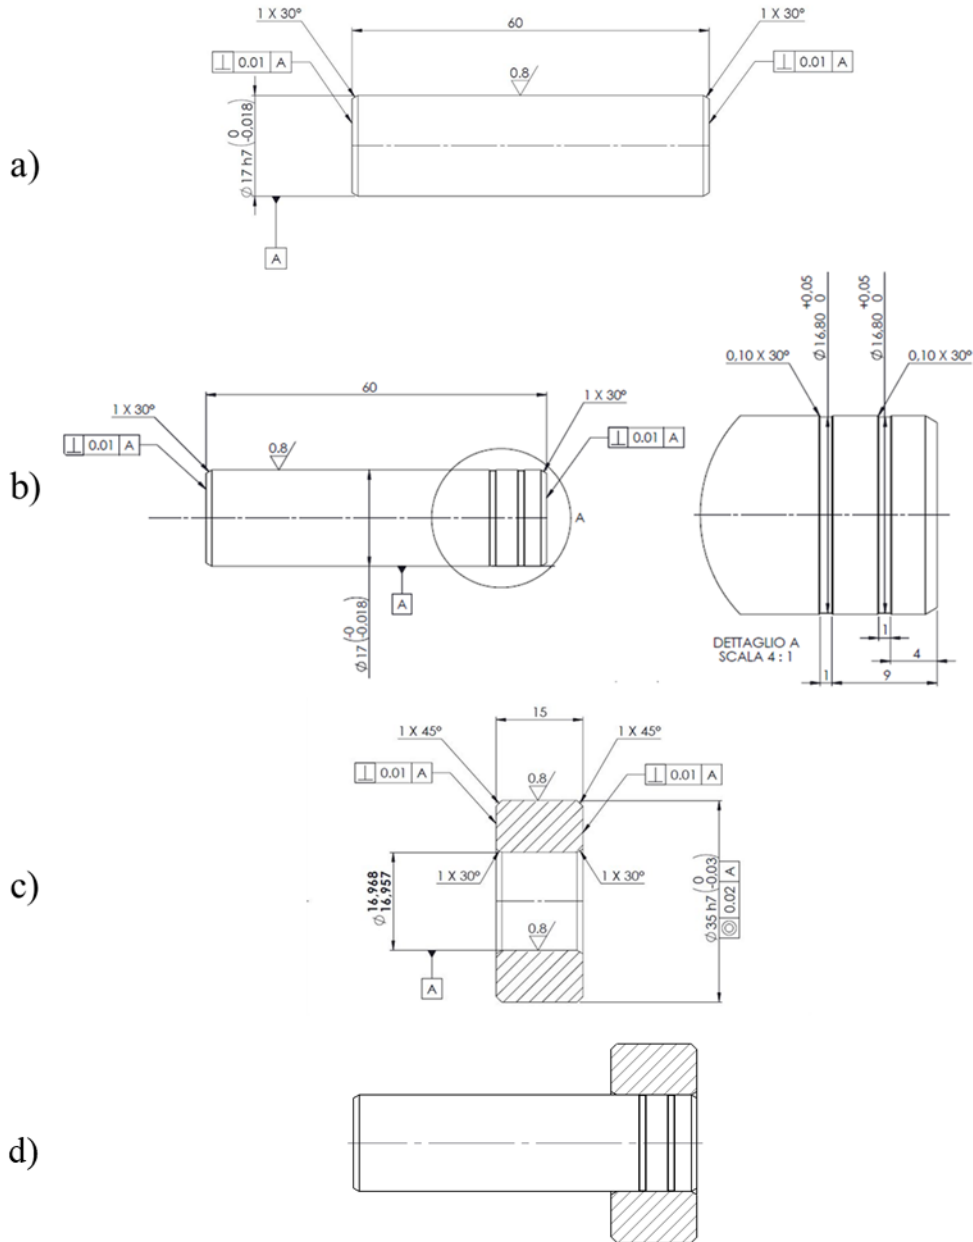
a) Smooth shaft geometry; b) shaft with hoop channels and its detail; c) hub geometry; d) shaft-hub assembly drawing with reference to a hoop-channeled shaft geometry (all dimensions are in mm)
